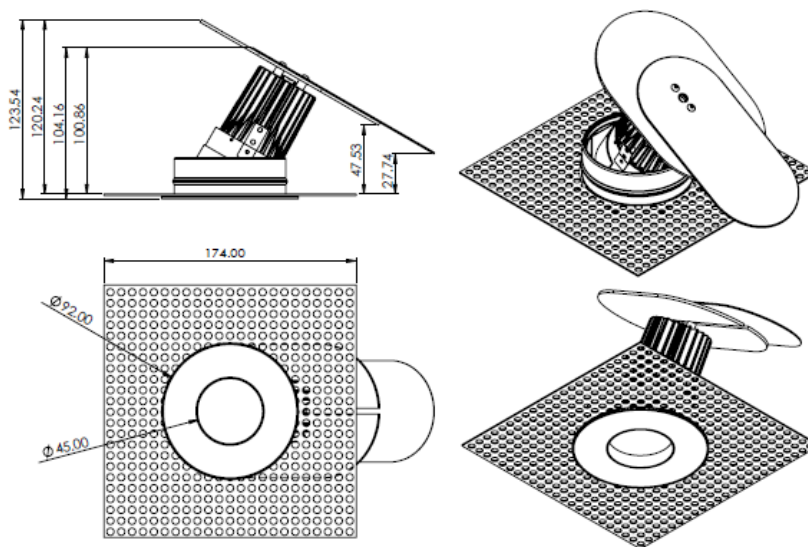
Details of Specimen 'B' Downlight (Pinhole Edge 90 Accent Trimless)
